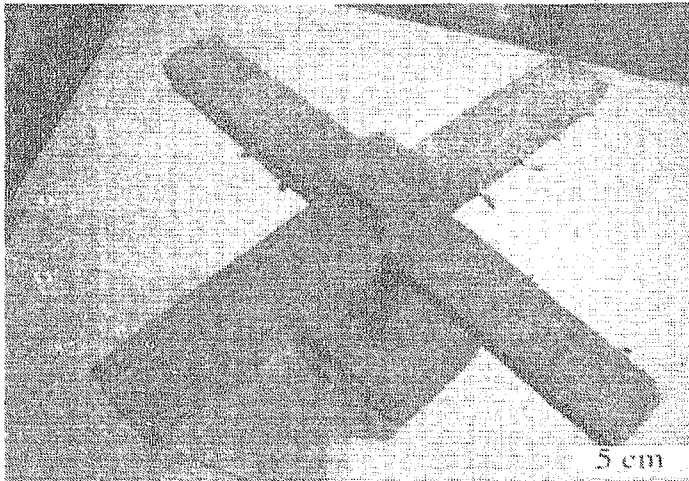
Casting: 700 °C / 1.6 pcf / with vacuum, bottom side.
